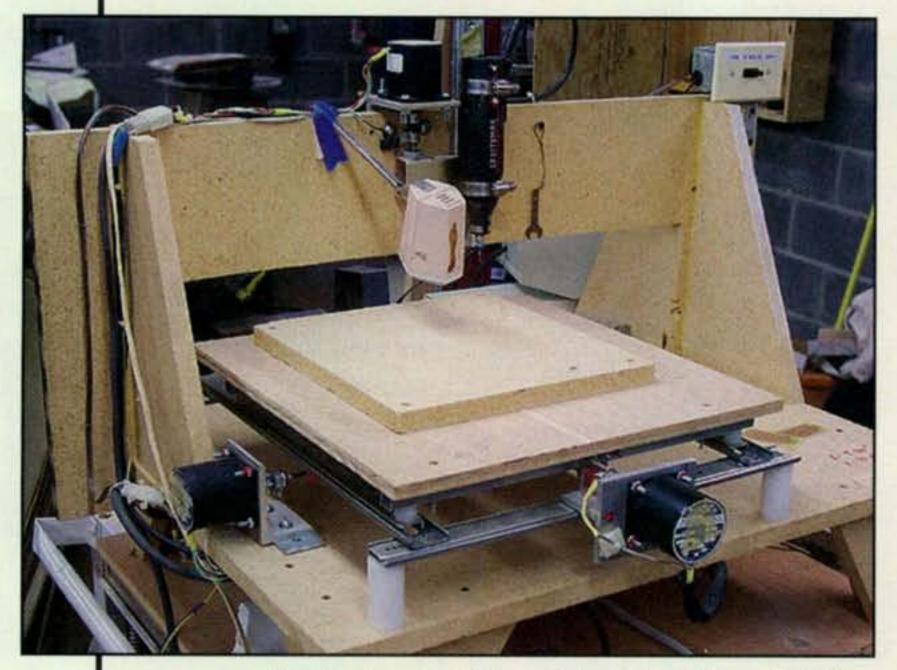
Photo A- My CNC printed-circuit-board drilling machine. The X and Y stepper motors are the black cylinders visible in front. These are connected to precision Acme lead screws. The Z axis motor and the Dremel tool used to turn the drills are visible near the top. At the upper right is the emergency cut-off switch.
